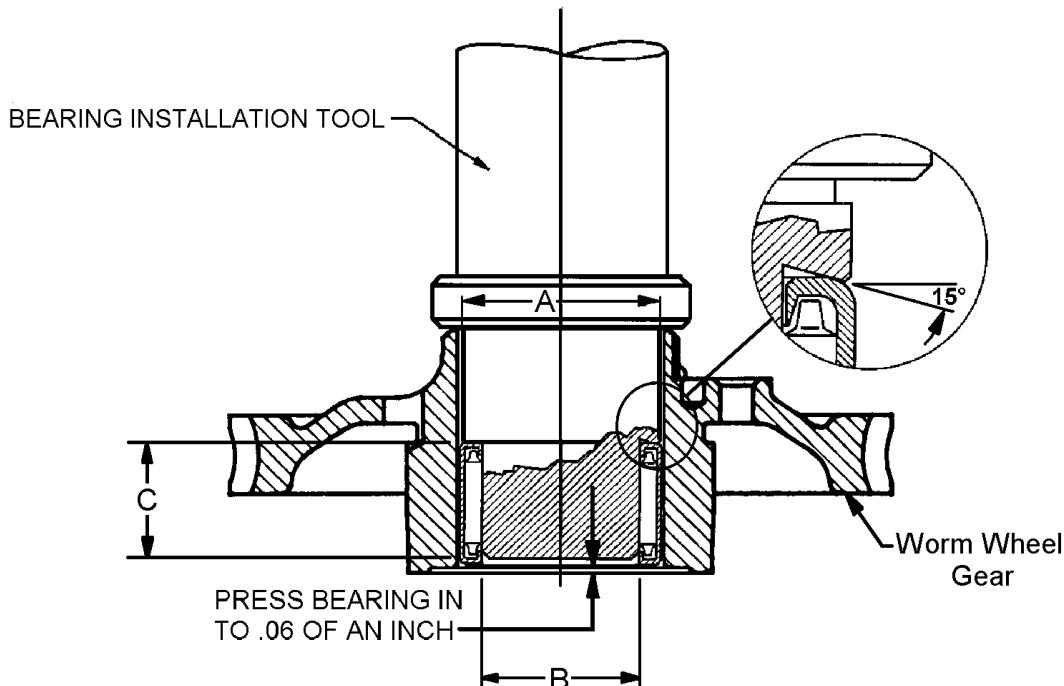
STARTER ADAPTER NEEDLE BEARING INSTALLER (continued)
